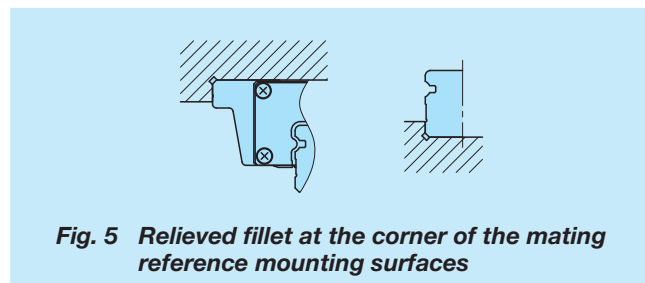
Relieved fillet at the corner of the mating reference mounting surfaces
